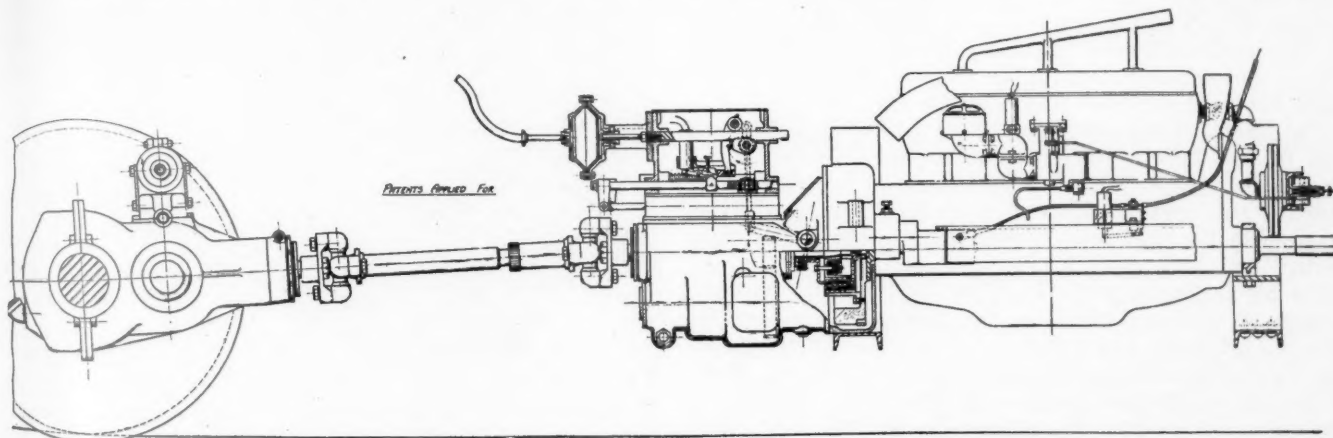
Elevation Showing One Driving Motor, Universal Joint and Gear Connection to the Axle
